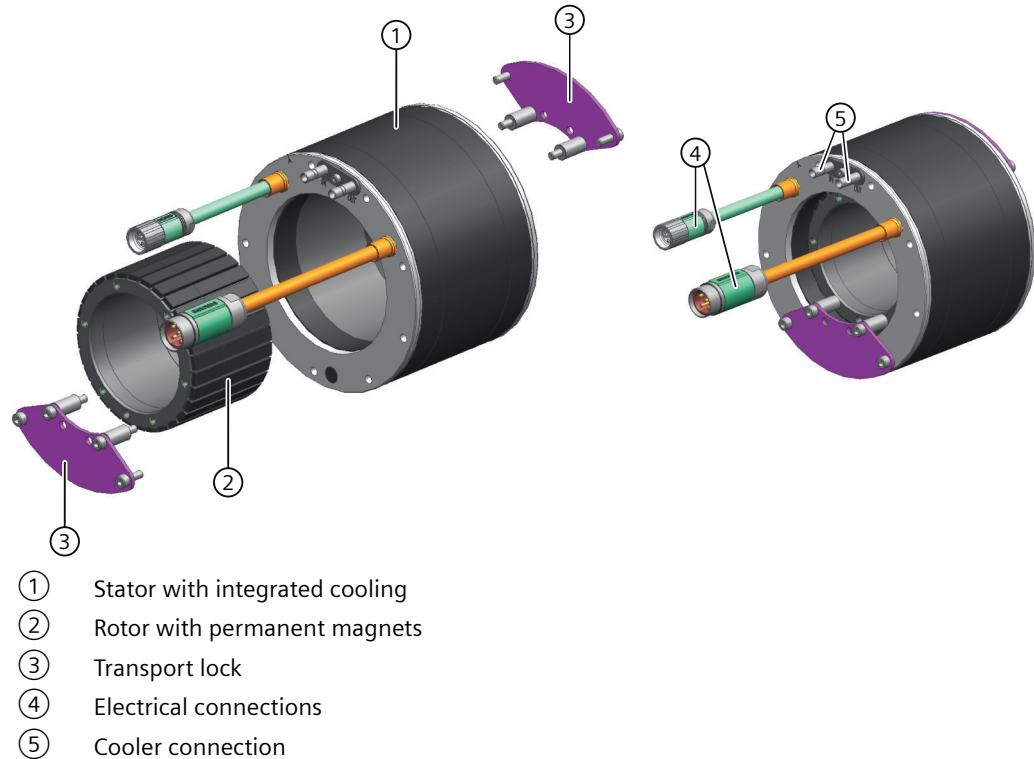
Motor components of the 1FW6050 and 1FW6060 built-in torque motors with integrated cooling (1 cooling circuit)
